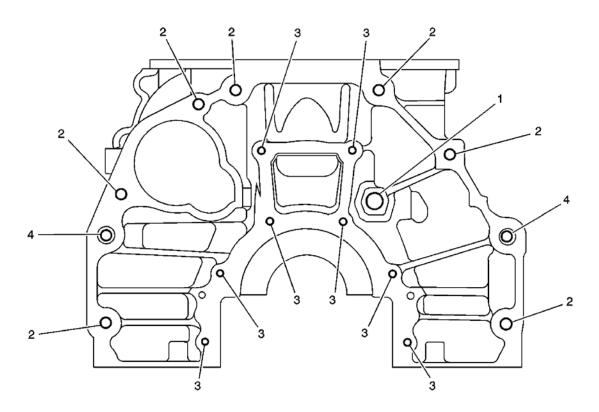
Engine Block Thread Repair - Rear View Courtesy of GENERAL MOTORS CORP.
